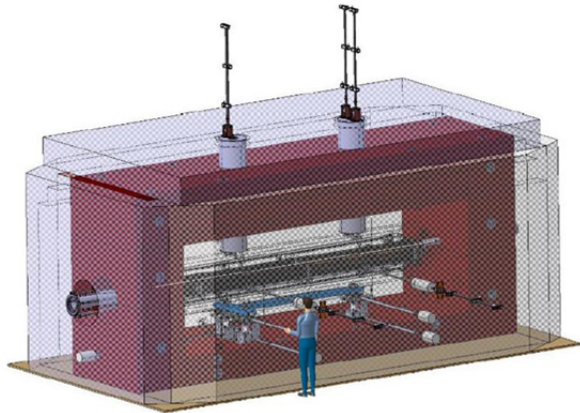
Design of new beam dump block and shielding structure for SPS LSS5.
